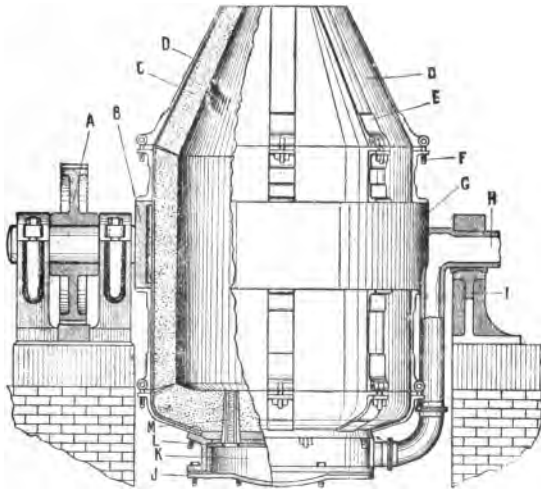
Bessemer Converter—Part Elevation, part Section.
